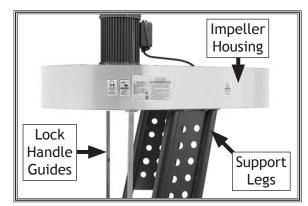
Impeller housing positioned on support legs and lock handle guides.
